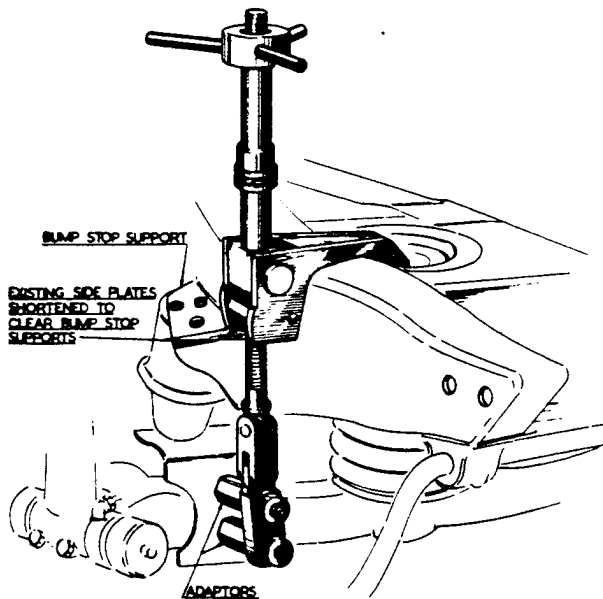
MODIFIED SPRING COMPRESSING TOOL IN POSITION.
